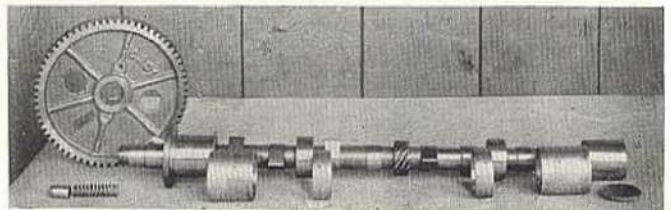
Camshaft with Gear, bushings and thrust button removed. Note expansion plug for rear bushing and position of oil holes in bushings.
